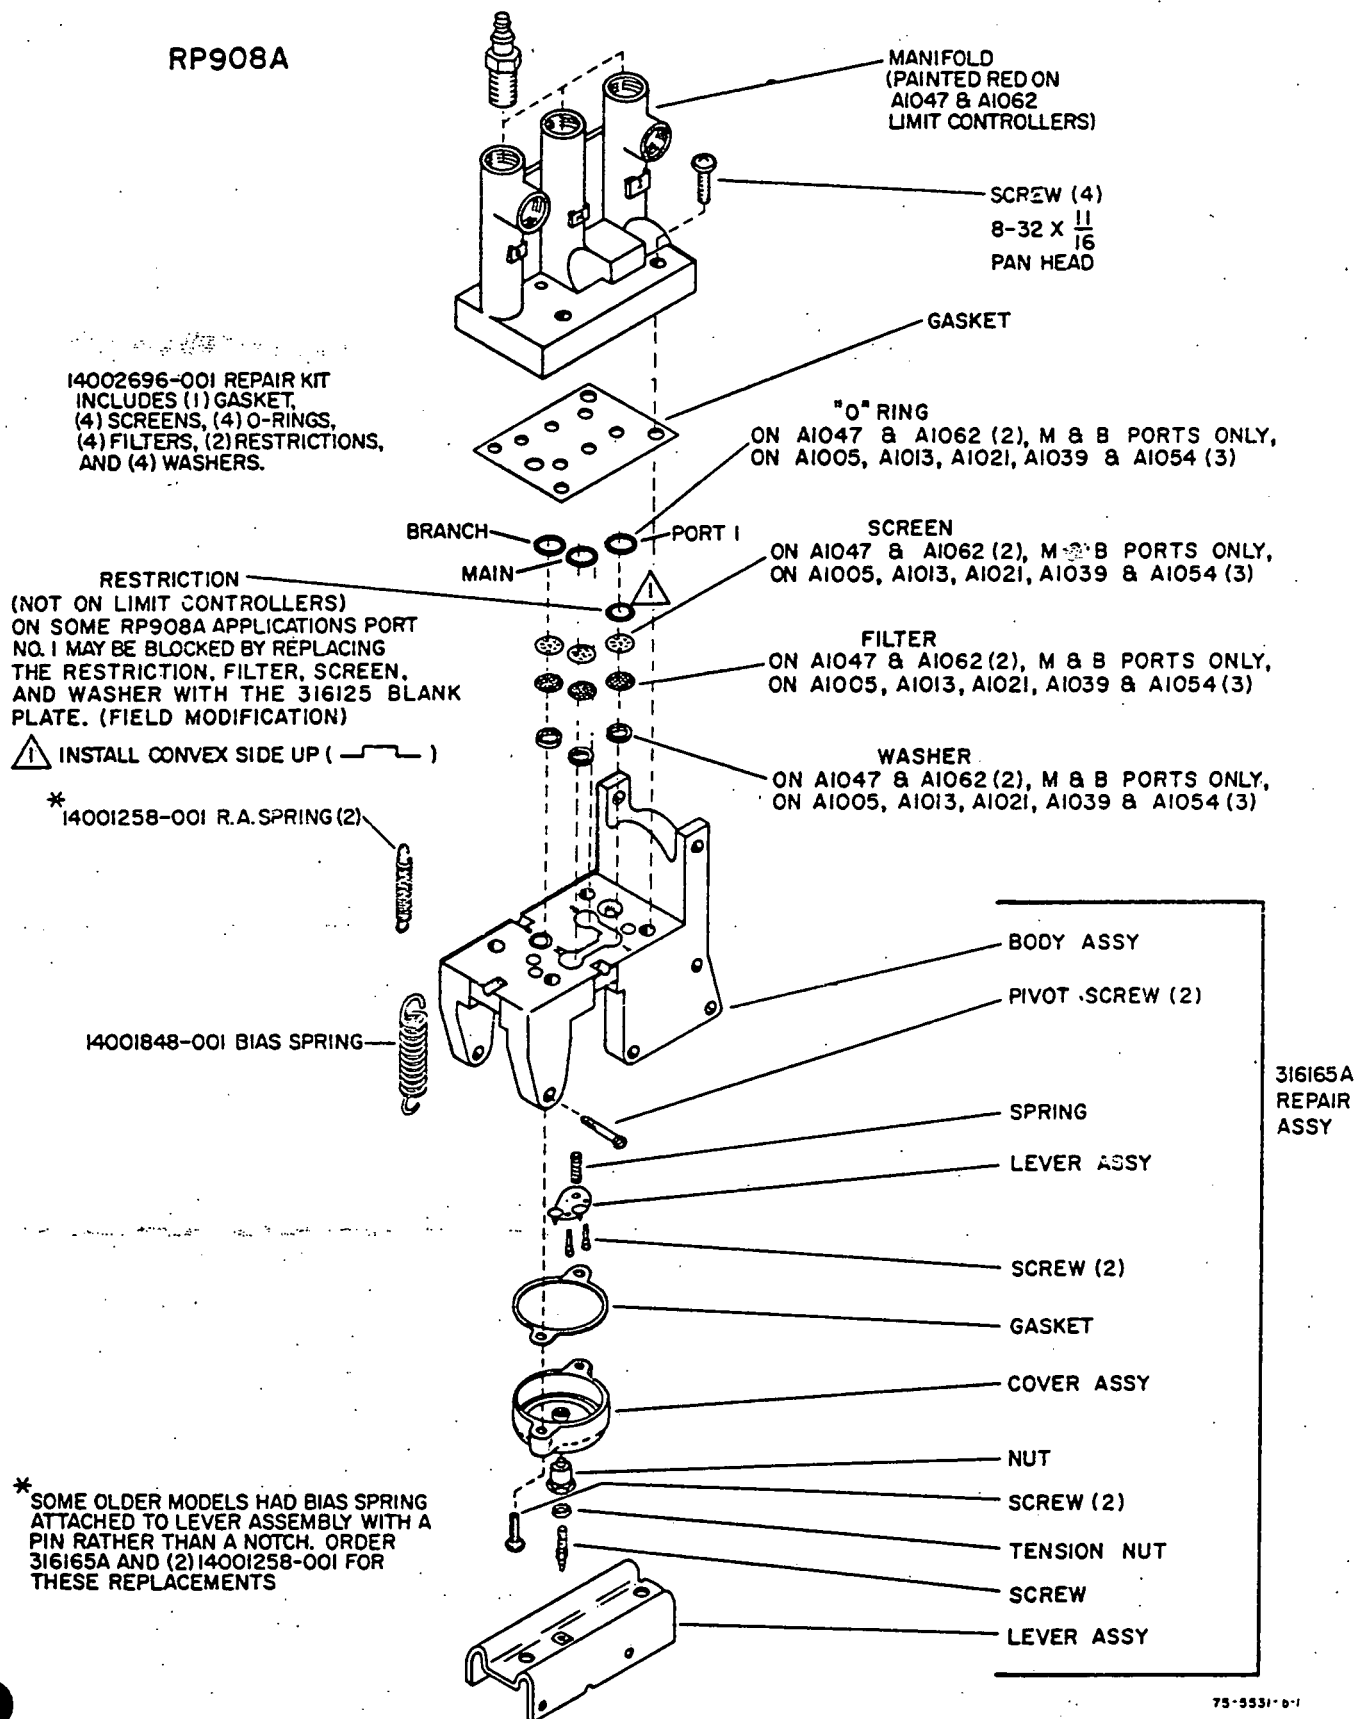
Detail of RP908A Manifold and Body Assembly.
